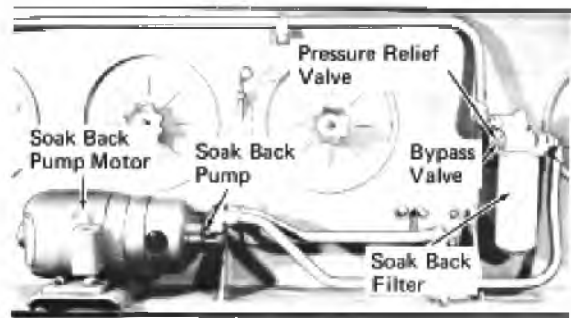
Soak Back Oil Motor, Pump, And Filter Installation
